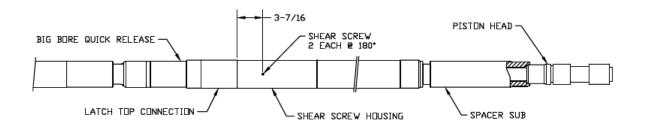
POSITIONING LATCH ROD WITH LATCH DOGS
